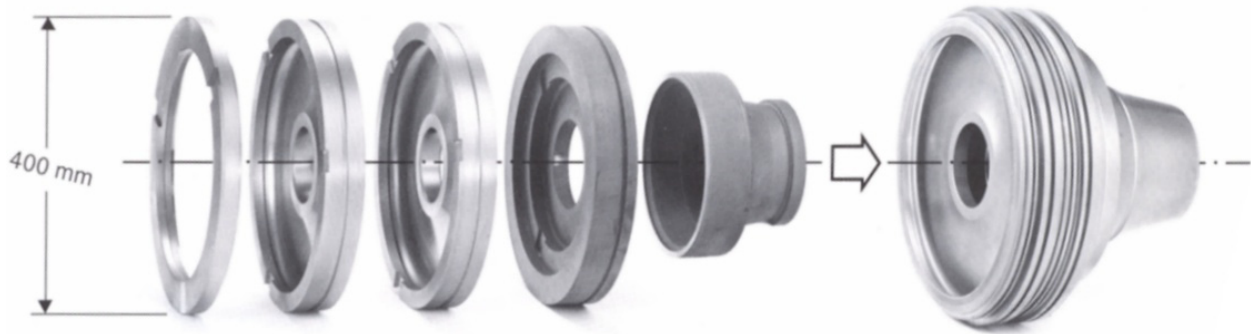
Example of an inertia welded rotor-drum consisting of 5 single parts
